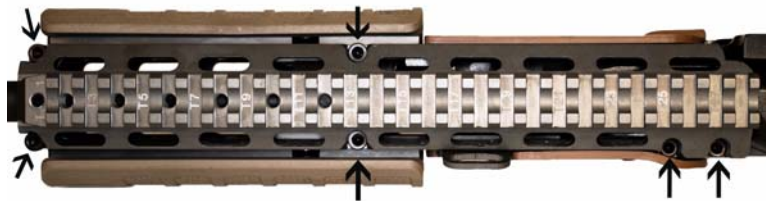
Reassemble Barrel and Receiver Assembly.
